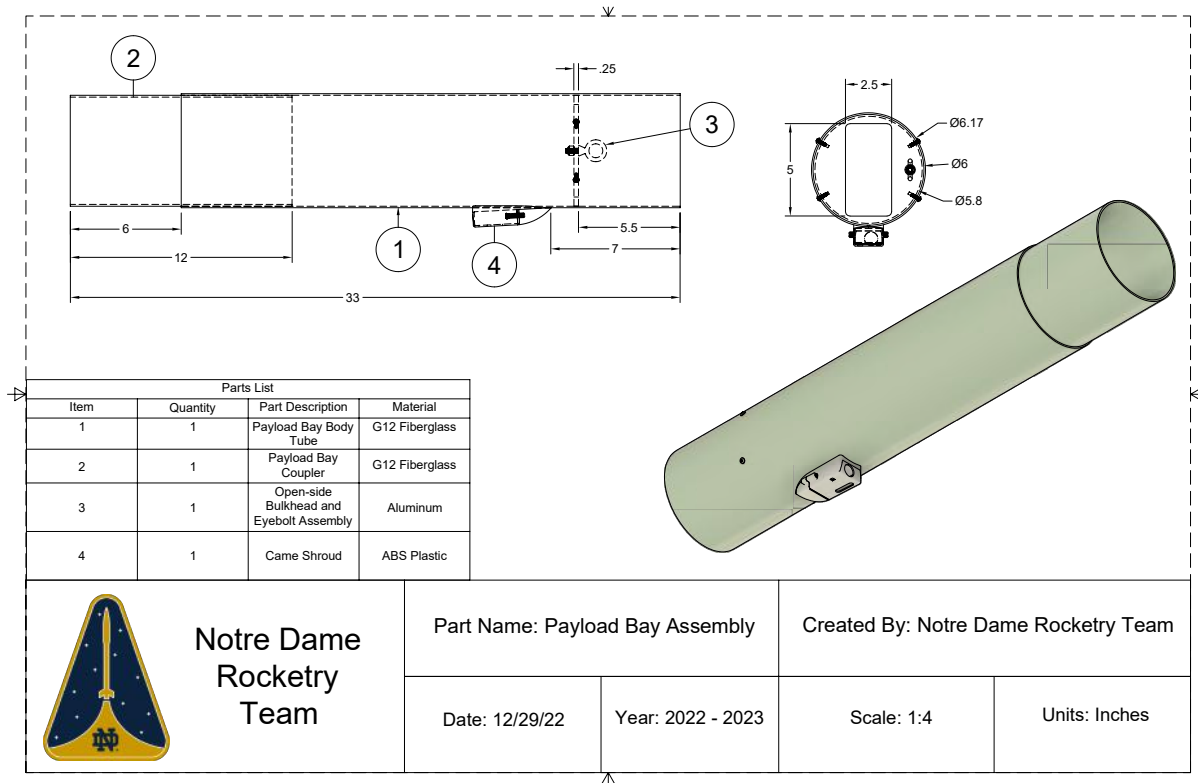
CAD Drawing of the Payload Bay Entire Assembly
